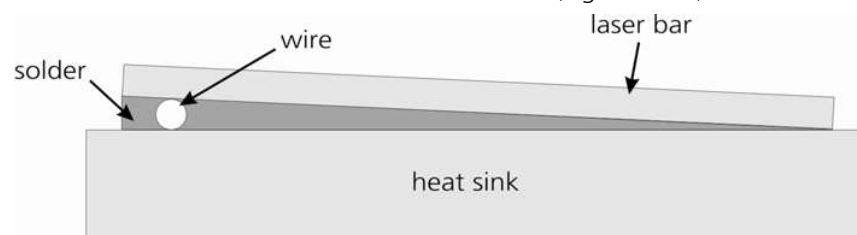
Schematic view (front view) of wedge-formed packaged diode laser. A 10 μm thick wire is used as a spacer to create a wedge-formed solder layer.
